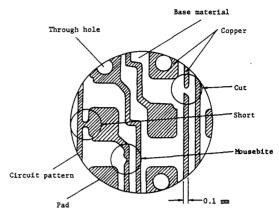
Magnified image of printed circuit board pattern and defects.
